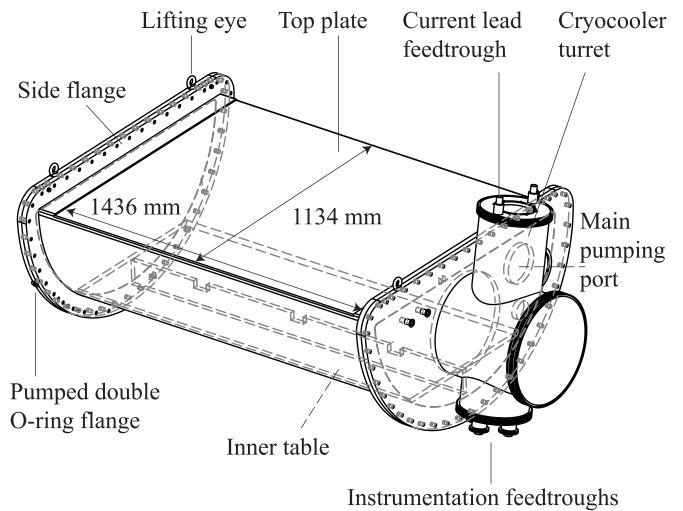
Schematic of the AISI 304 stainless steel MDS cryostat indicating the main vacuum vessel with D-shaped side flanges. The flanges are attached to the main chamber via double O-ring connections. One of the flanges has a turret attached to it which houses the cryocooler and instrumentation ports. The turret is directed vertical whereas the top plate is placed at a 12° angle relative to the horizontal plane. The reason for this tilt is discussed in [14]. Also present in the turret are the current leads. Electrical- and thermal connections are made by accessing the turret via a side-flange with diameter 400 mm. Inside the cryostat a steel table is welded parallel to the top plate. During assembly the cold mass is installed on an aluminium plate, which is then slid onto the steel table. The support structure between cryostat and the floor is not shown.
